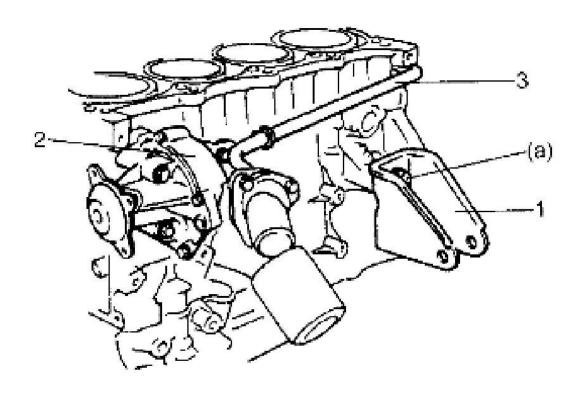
Installing Water Pump And Heater Outlet Pipe Courtesy of SUZUKI OF AMERICA CORP.
